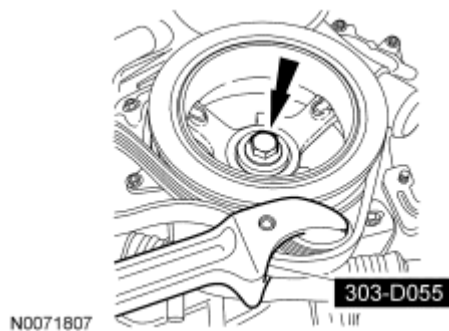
Removing Crankshaft Pulley Bolt & Washer Using Strap Wrench
